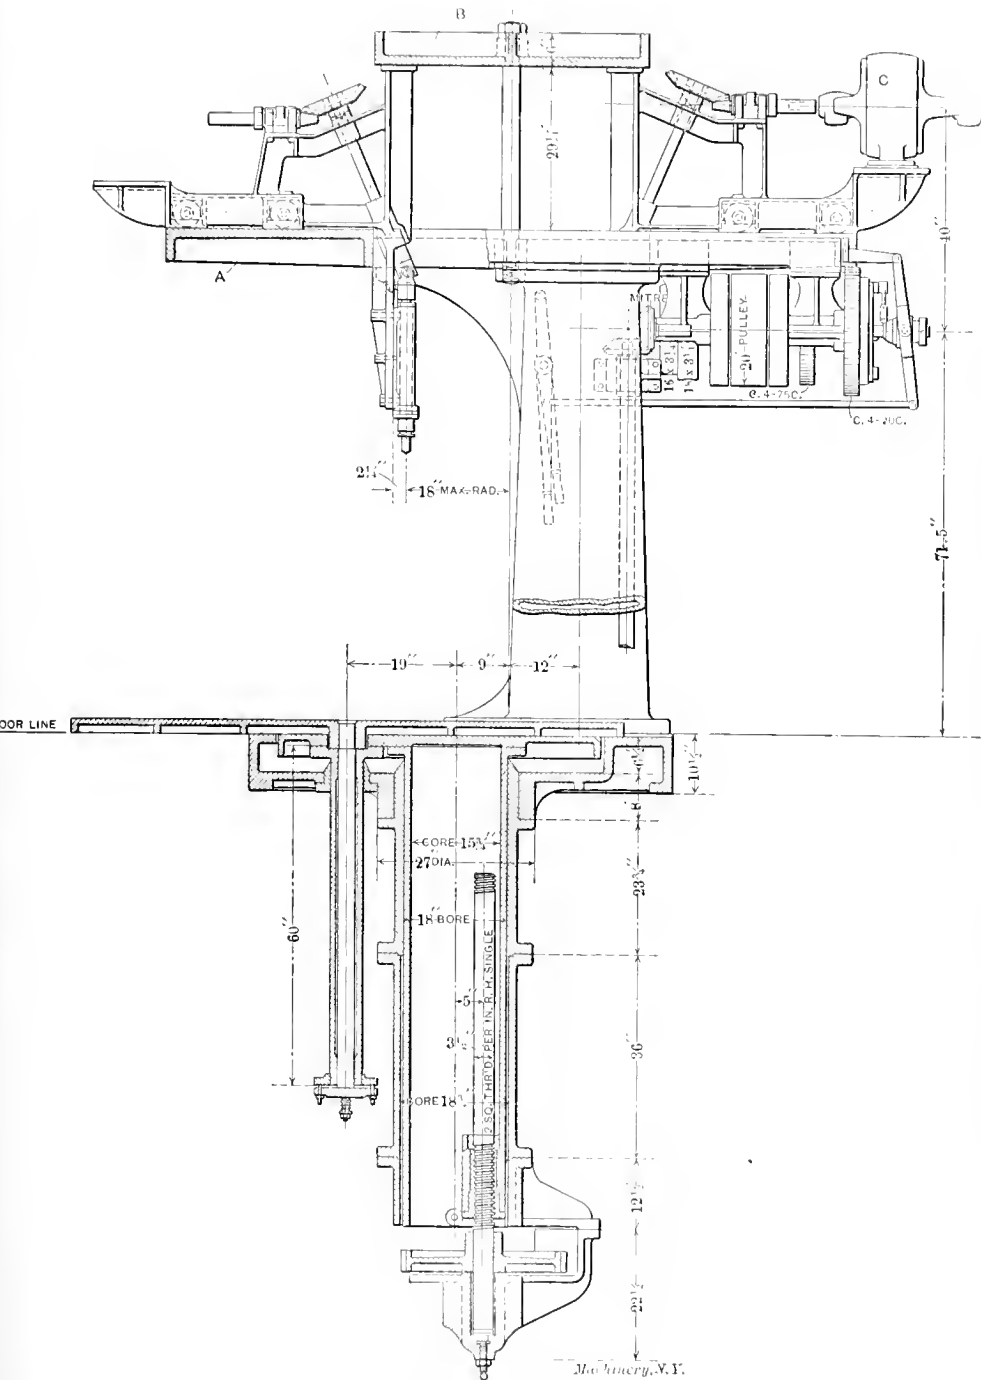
Vertical Section of Crane 16-spindle Drill, showing Bearing and Thrust Plates, and Motor and Drill Spindle Connection.
